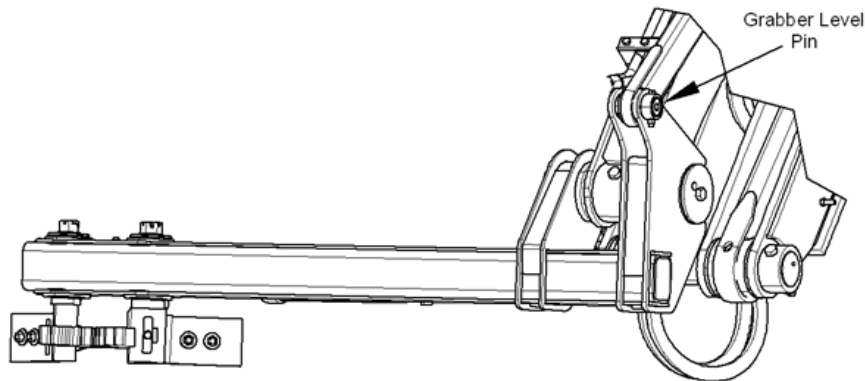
Grabber Beam and Gear Assemblies with Retainer Plate and Pin Retaining Bolt
